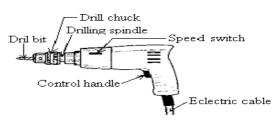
Portable drilling machine or Electrical hand drilling machine
